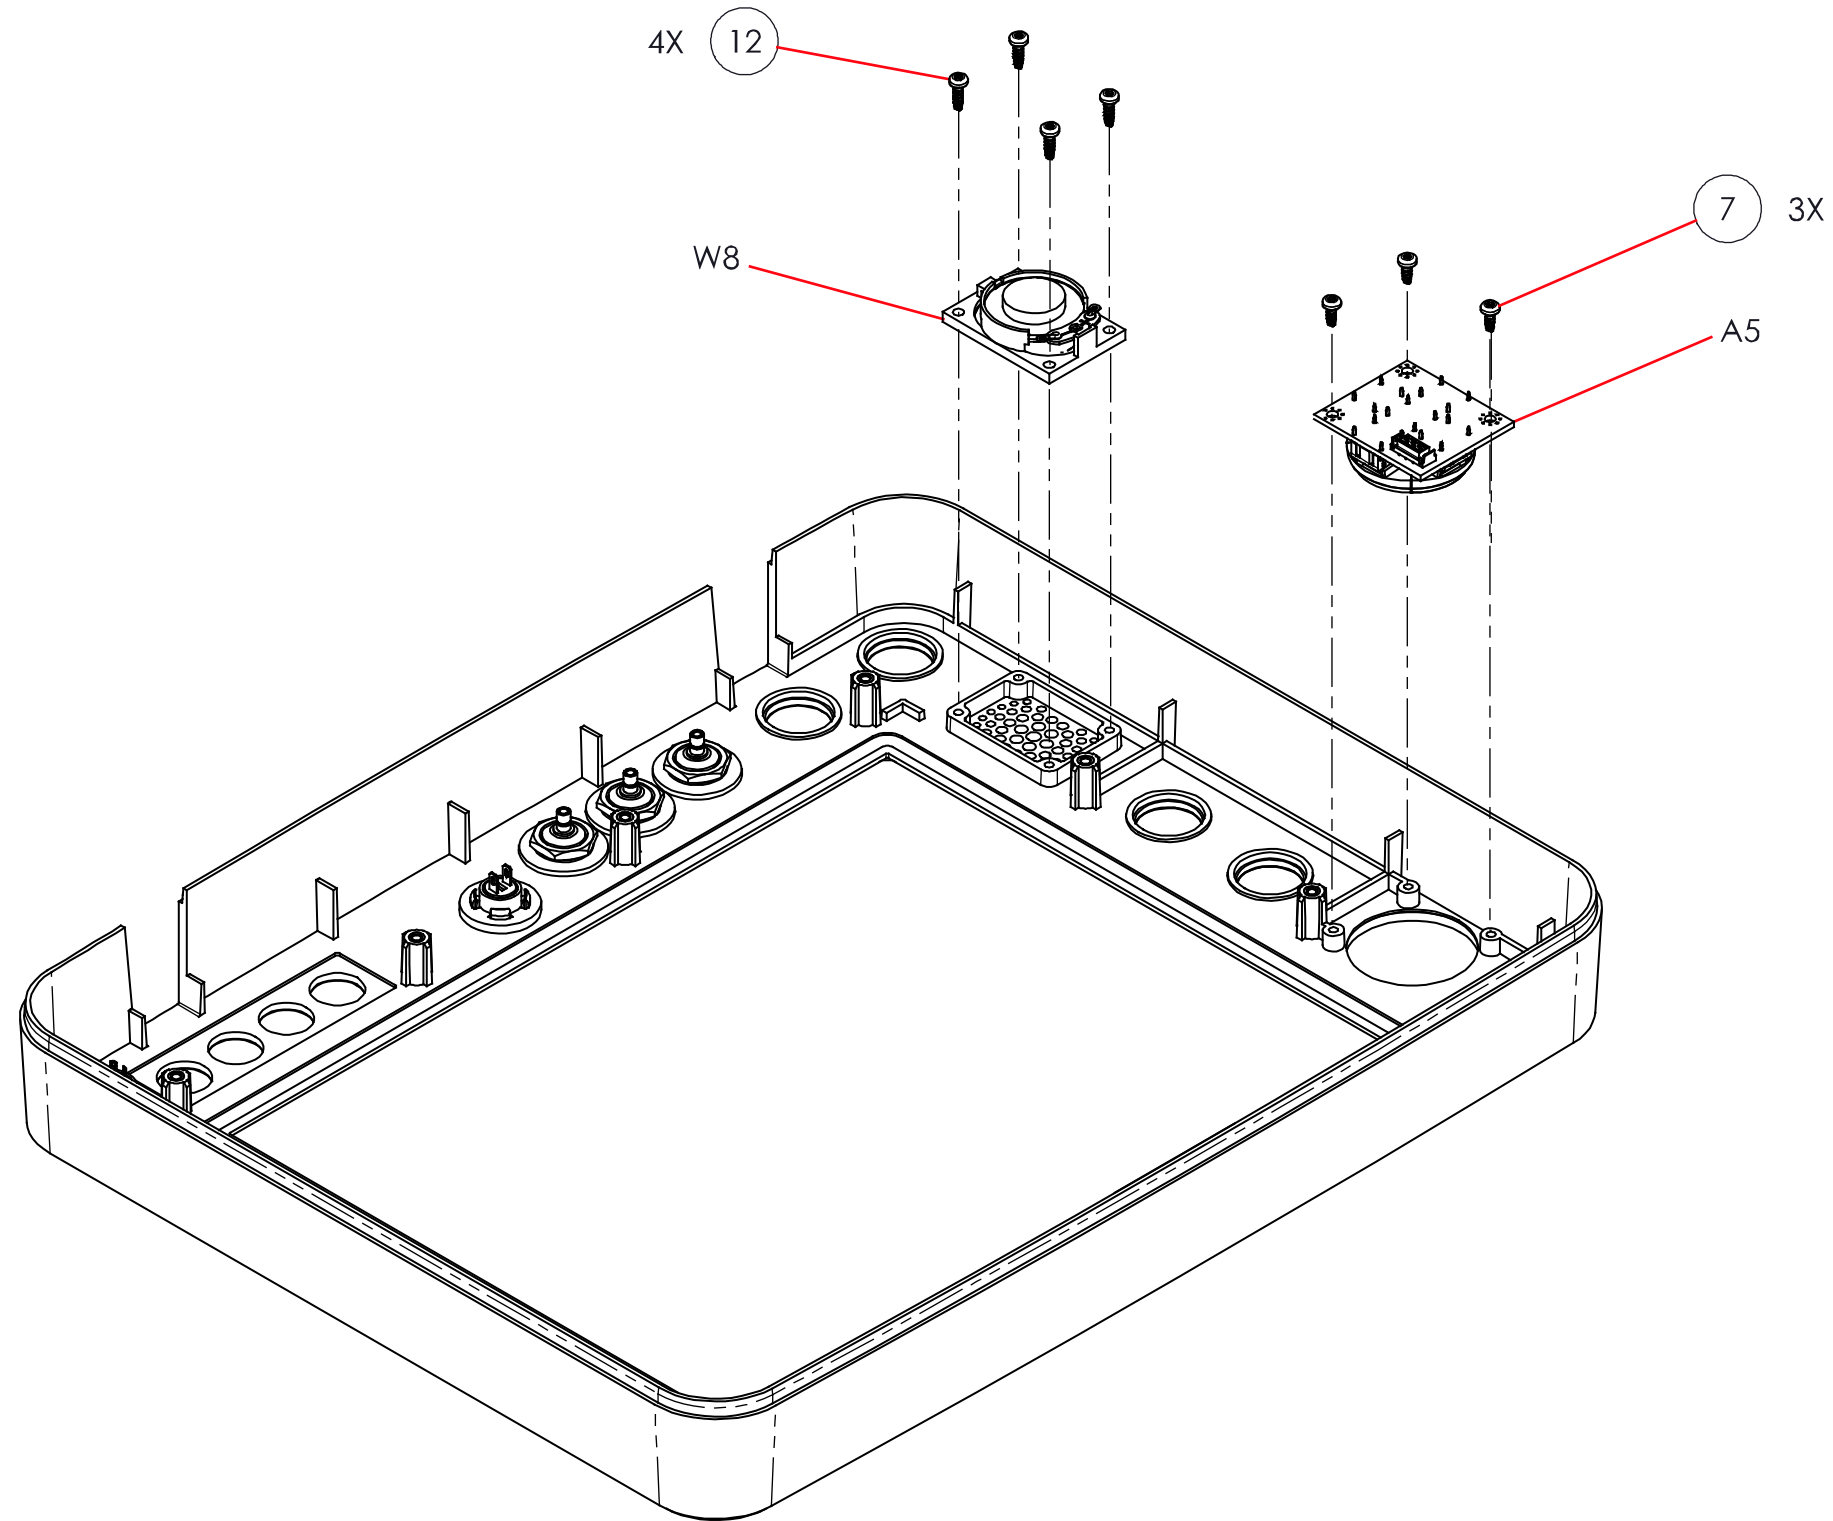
Front Chassis / Panel Assy (Sheet 2 of 6)
